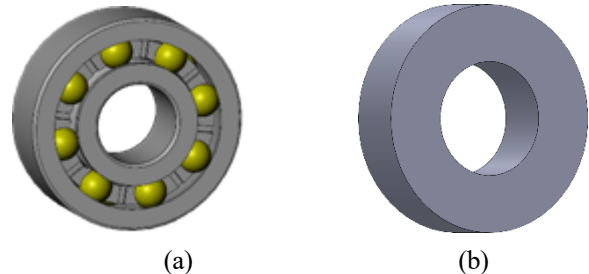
Different shapes for bearing components: (a) Detailed assembly (b) Simplified as a single part.
